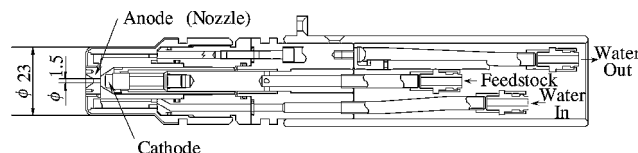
Schematic of plasma torch (dimensions in millimeters).
